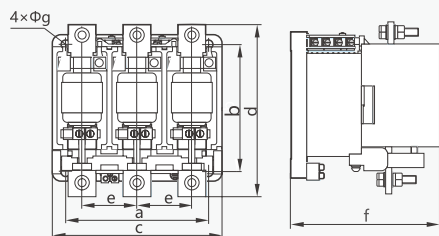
CKJ5-630 Appearance and Installation Dimensions
